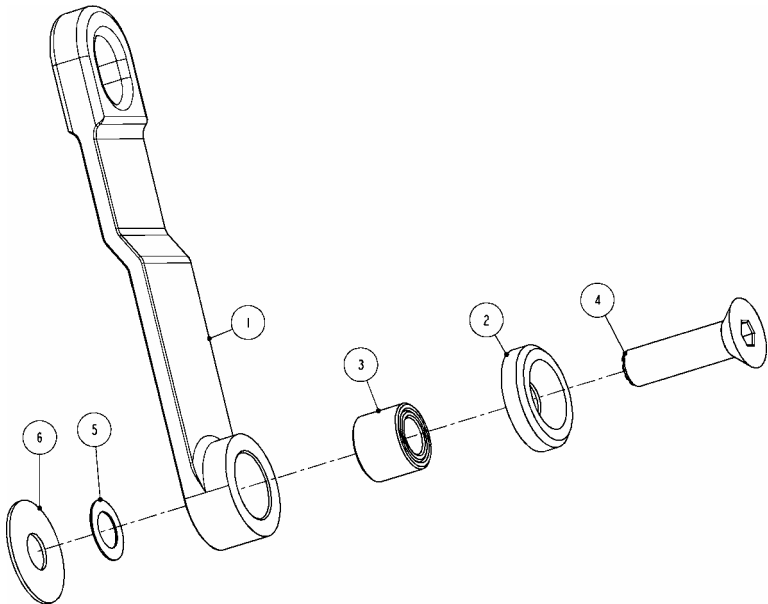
1202540: SWITCH PLATE ASSEMBLY
